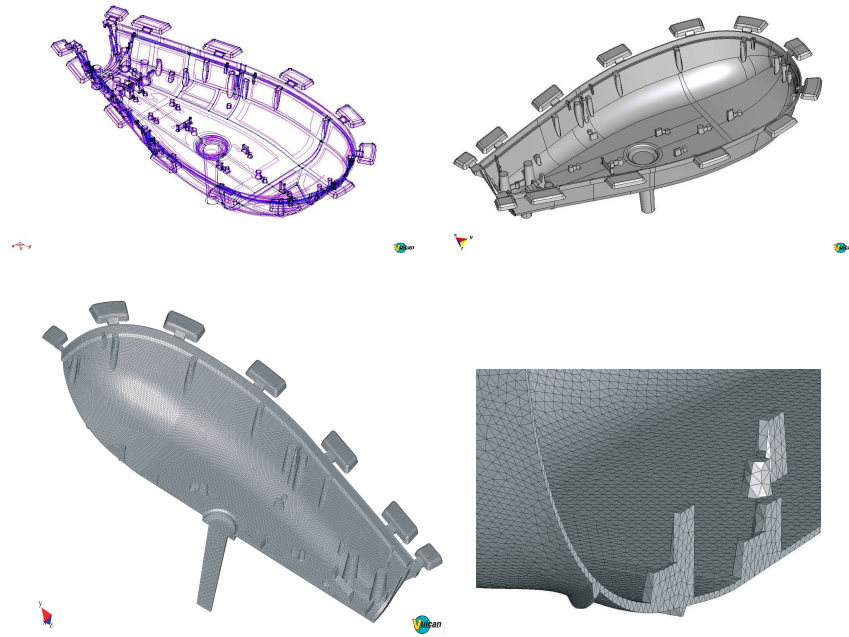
HP Die-casting process: CAD geometry and FE mesh generated
